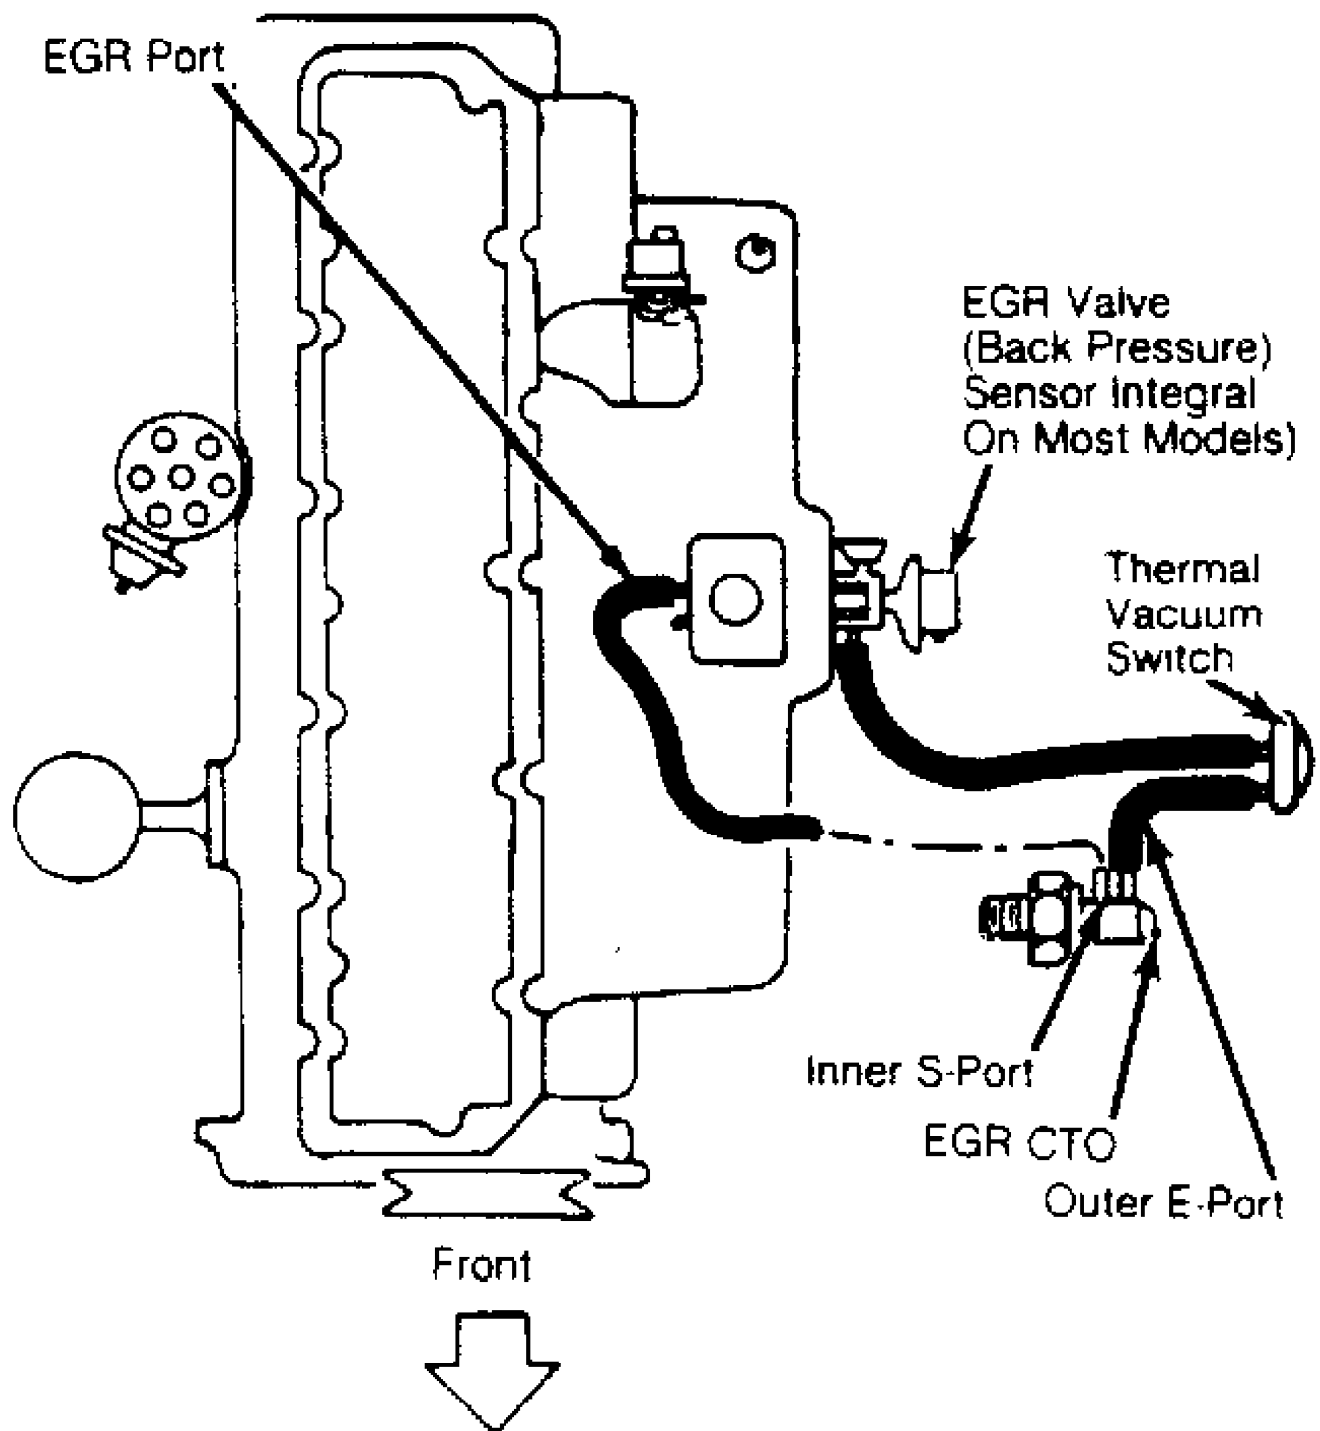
Jeep 6-Cylinder Carbureted Engine EGR System
